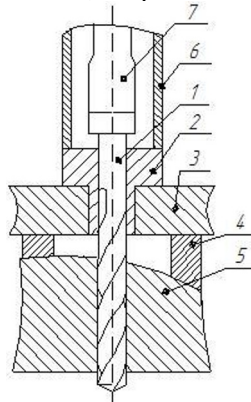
Method of drilling non-technological holes: 1- drill, 2-guide bushing, 3-quick-change bushing, 4-pin, 5-part, 6-bush, 7-spindle
